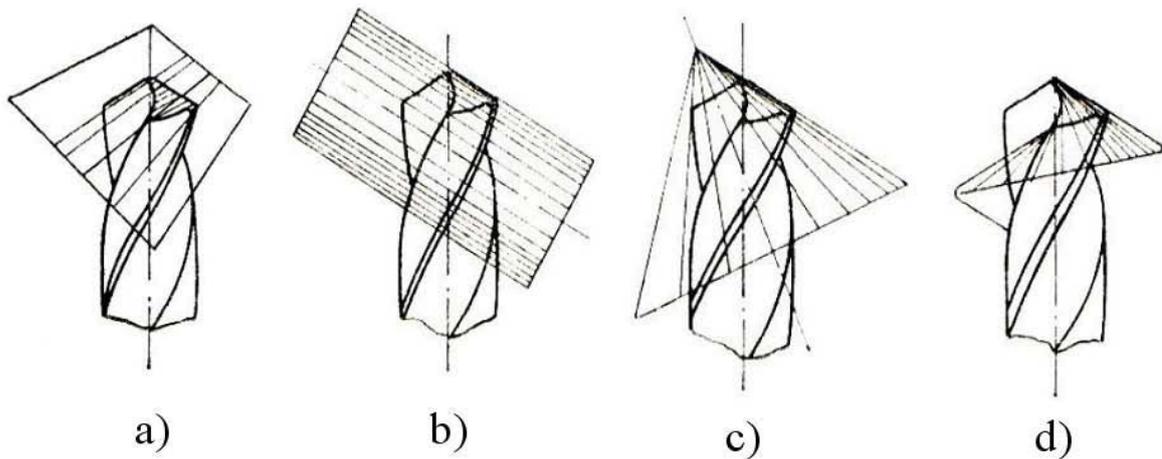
Point grinding methods for twist drill: a) Plain flank grinding, b) Cylindrical flank grinding, c) Conical flank grinding, d) Helical flank grinding [9].
